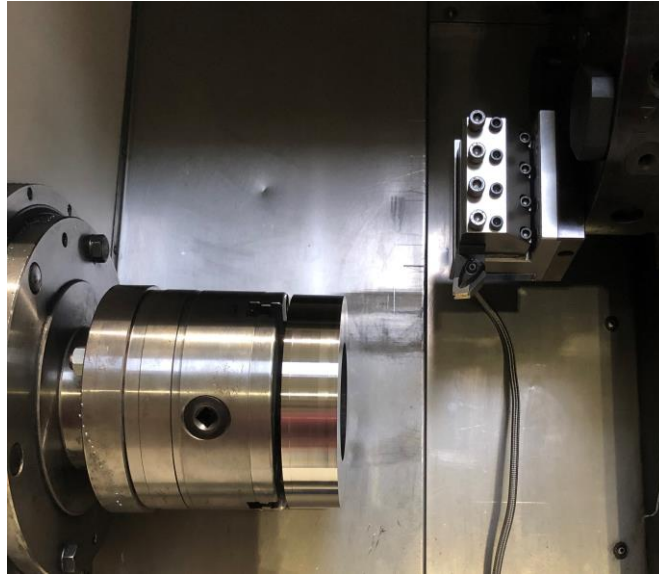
Turning set up and workpiece. Force dynamometer, tool holder and PcBN insert.
